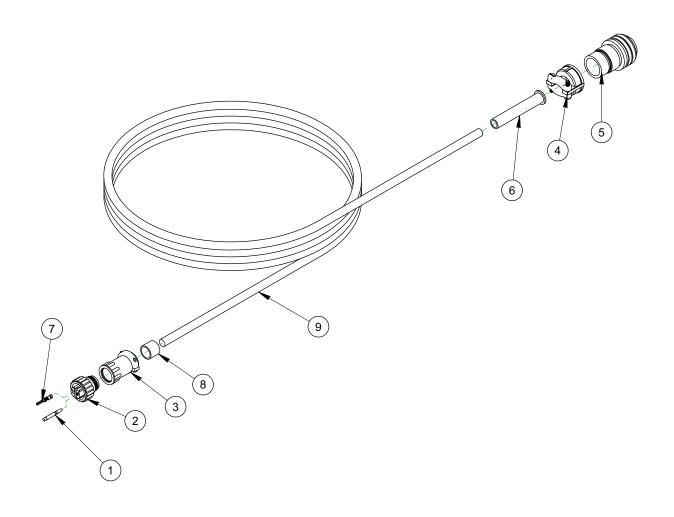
CONDUIT ASSEMBLY FOR TWECO (P/N 85534)
